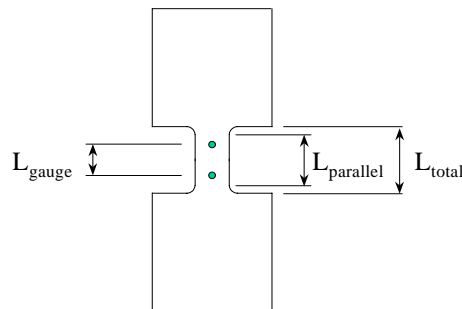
Definitions of dimensions in the gauge section. L_{parallel} is the Parallel Length, which is the reduced section with a constant width. L_{gauge} is the Gauge Length when an extensometer is used, or lightly marked by indentations or ink. L_{total} is the Total Length that includes the parallel length and the shoulders.
